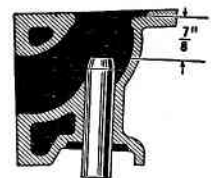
Position of valve stem guides in six cylinder 148" and 161" L-Head engines
